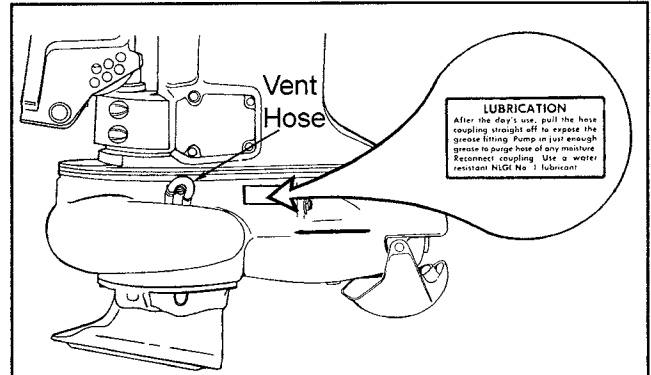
Jet drive models require lubrication of the bearing after each day of use, a label on the housing usually reminds the owner
